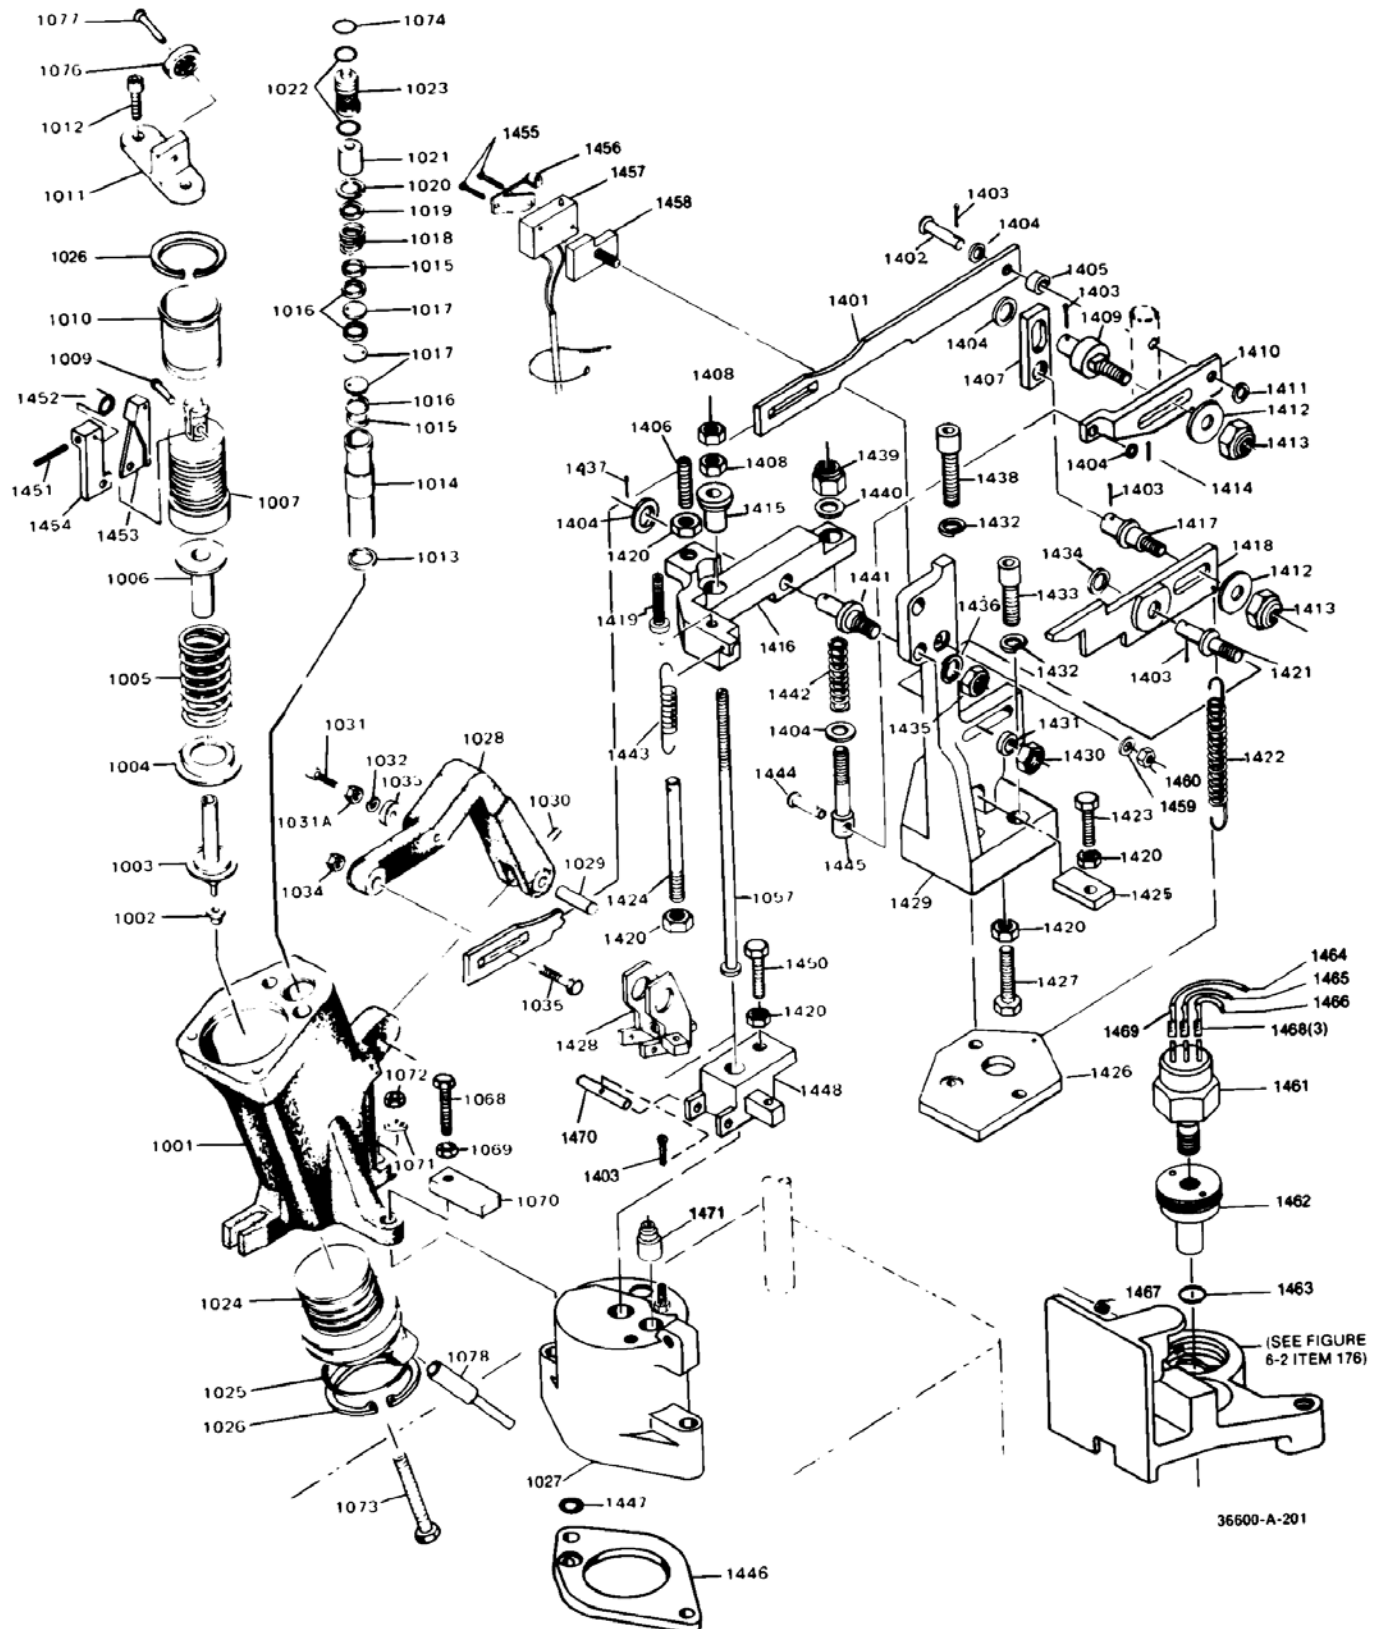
Exploded View of Angle Type Manifold Gauge Pressure Fuel Limiter
